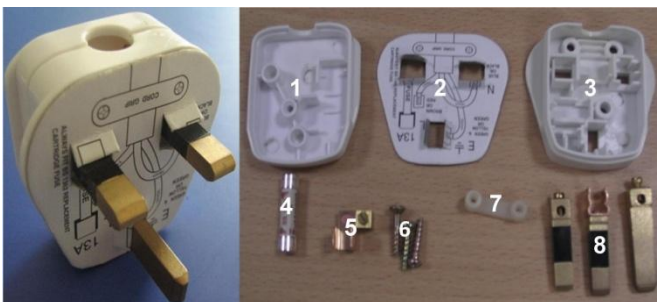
Three pin electrical plug UK type (left) and its components (right)
